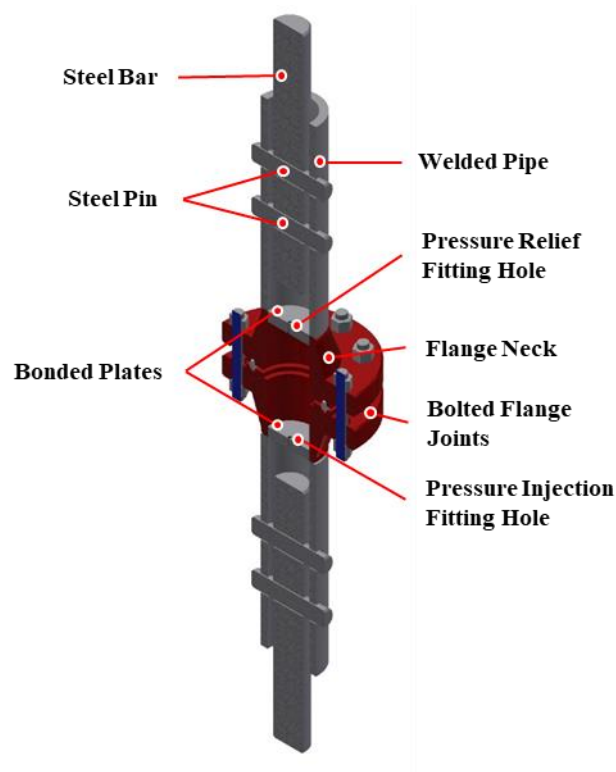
3D modeling of the bolted flange joint for tensile testing
